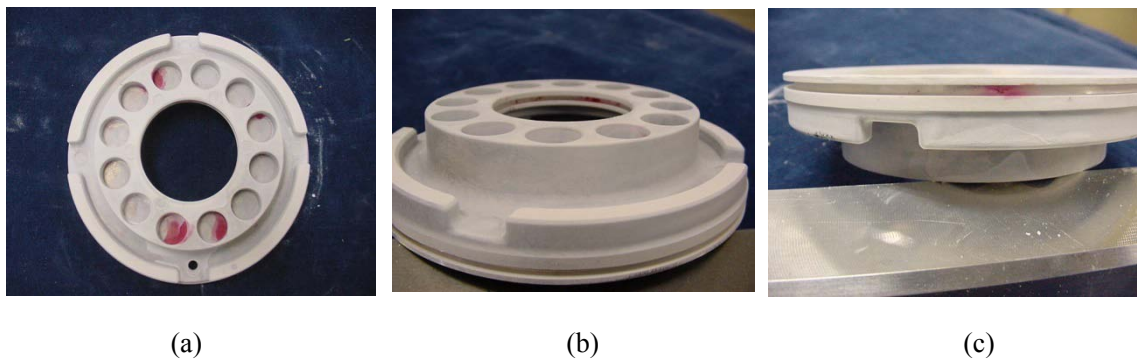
Defect on the surface of the clutch piston by color checks method
